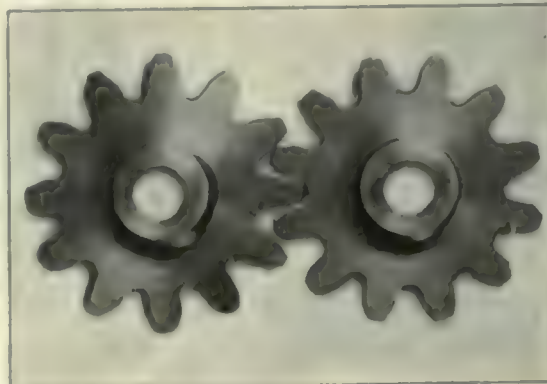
PAIR OF PINIONS CUT ON A MILLING MACHINE
